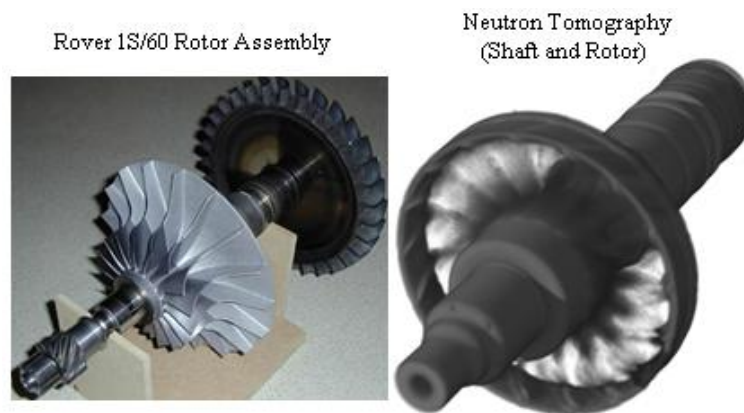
Rover 1S/60 Shaft and Rotor Assembly with Neutron Tomography Image (Bennet, 2011) and (RLQDesign, 2009)
